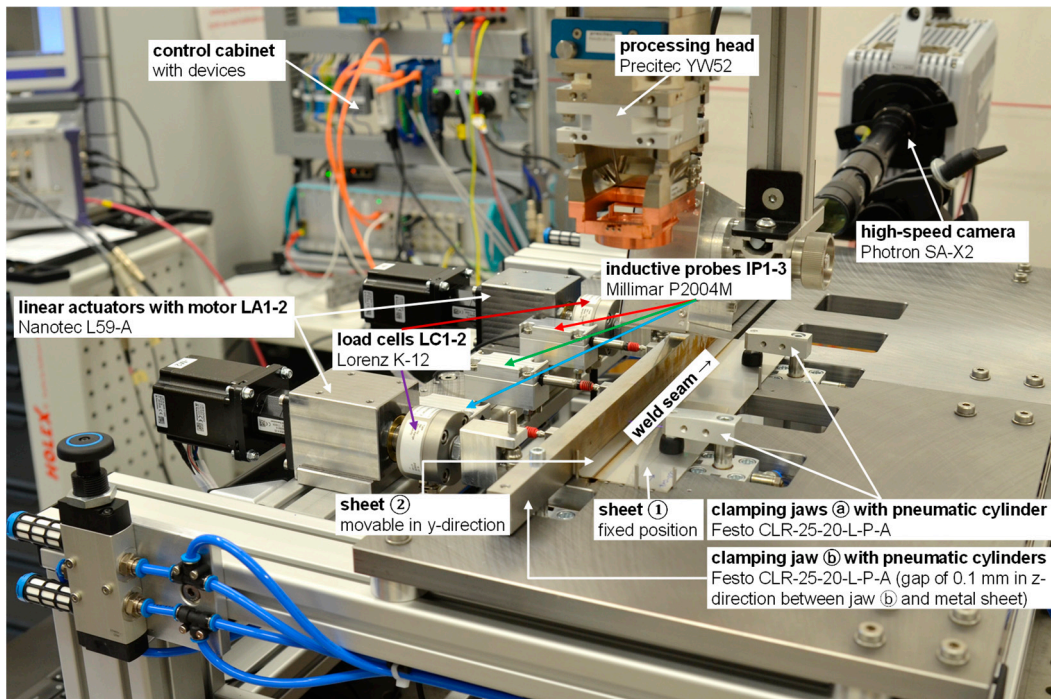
Realization of adaptive clamping device in laser welding setup (housings of load cells and actuators removed).
